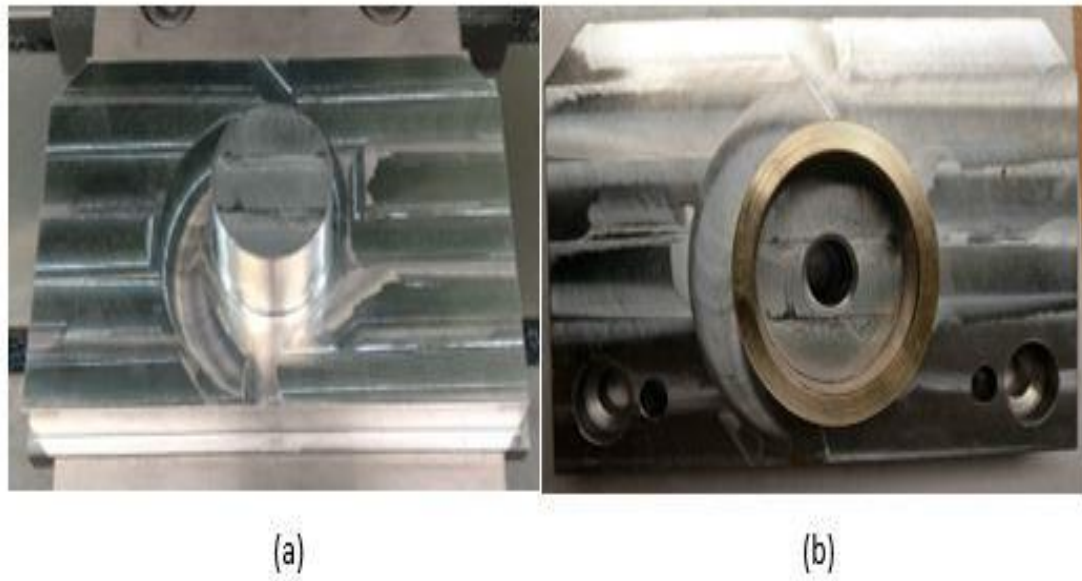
A block of steel after pocketing and profiling (b) Machined part with a bronze ring attached to check fit.
